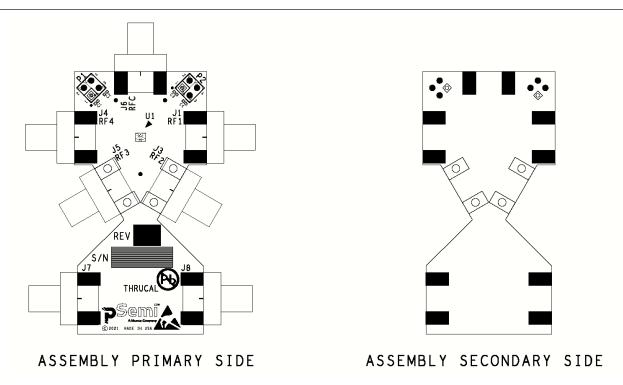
• Evaluation Board Layout, Top Layer for PE42546
